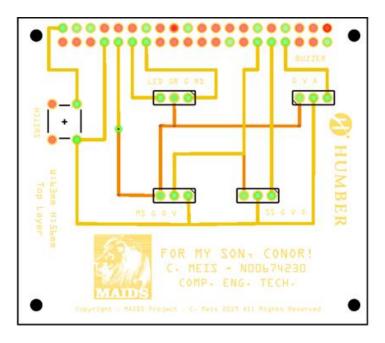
MAIDS PCB BOARD DESIGN DIAGRAM.
